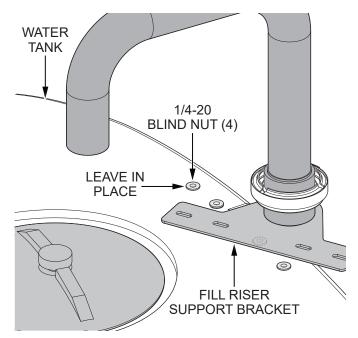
Fill Riser Support Bracket Blind Nuts (Leave In Place)
